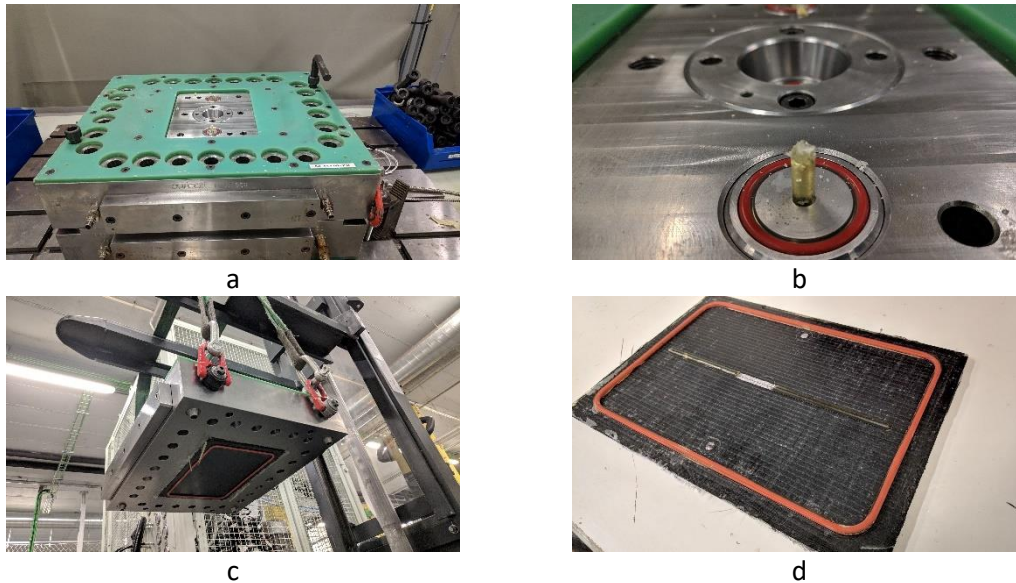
Demolding process. a) Mold opening using extraction bolts. b) Detail of remanent resin at the channels of vacuum. c) Opening of the mold using a hydraulic elevator. d) Final part detachment
